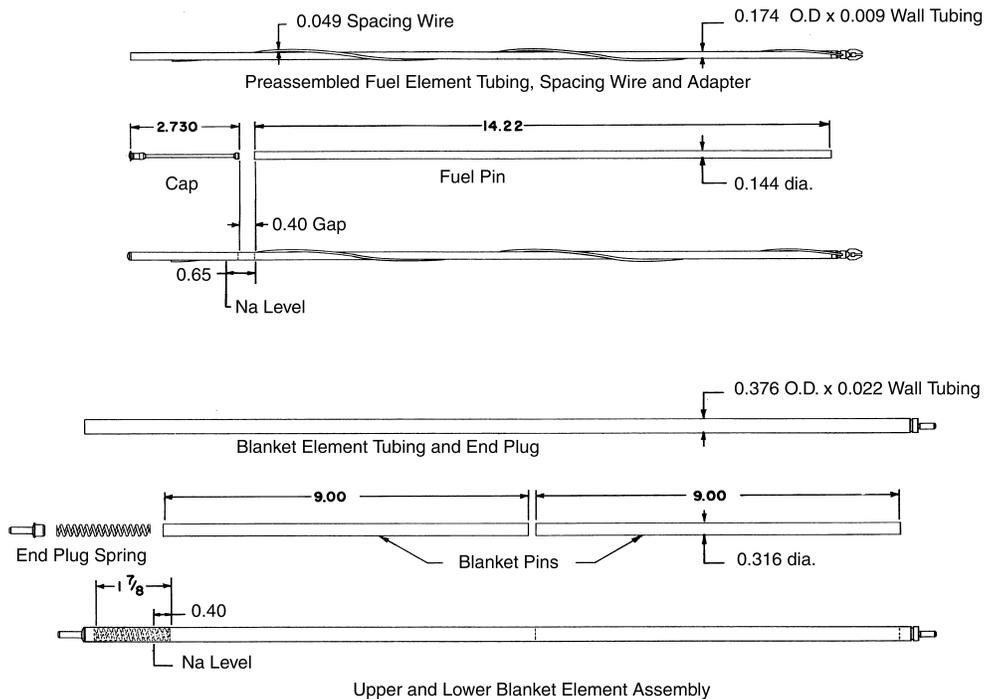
CORE SUBASSEMBLY ELEMENTS.
